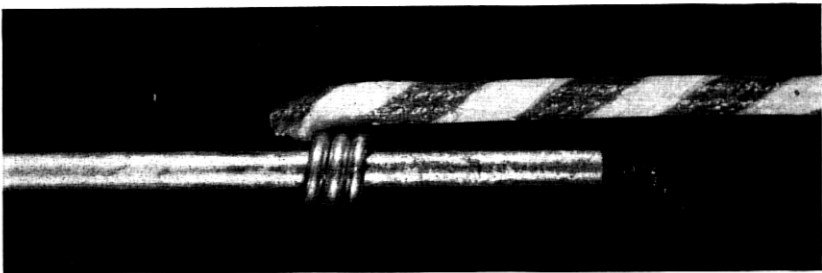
A wrapped connection on a wire spring terminal, before soldering.
